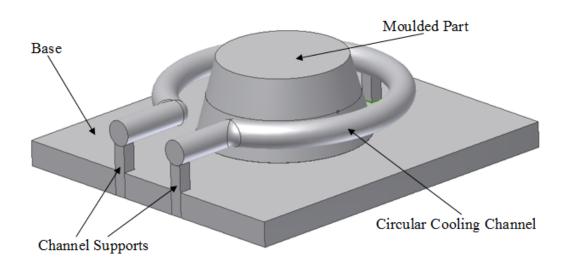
Circular Conformal Cooling Channel Pattern Assembly
